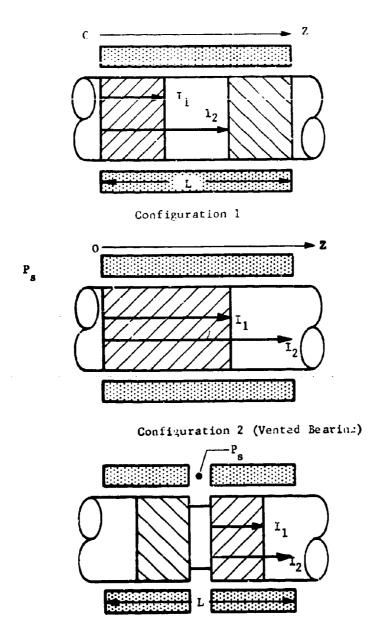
Schematic of Spiral-Grooved Journal Bearing
